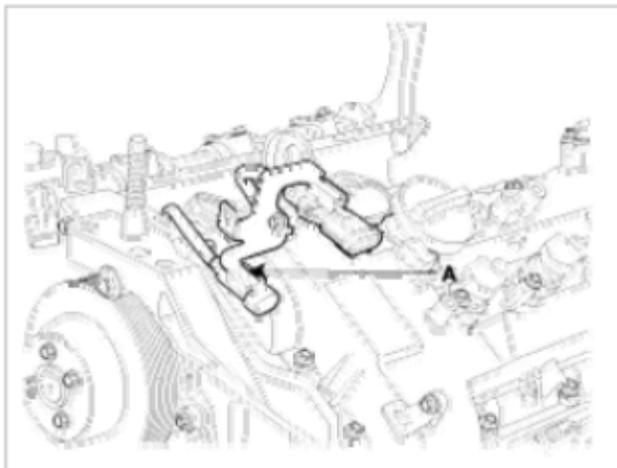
Locating LH Cylinder Head Cover Connector Bracket
